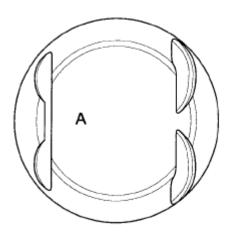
Locating Radiator Cap Hose Courtesy of HYUNDAI MOTOR CO.
